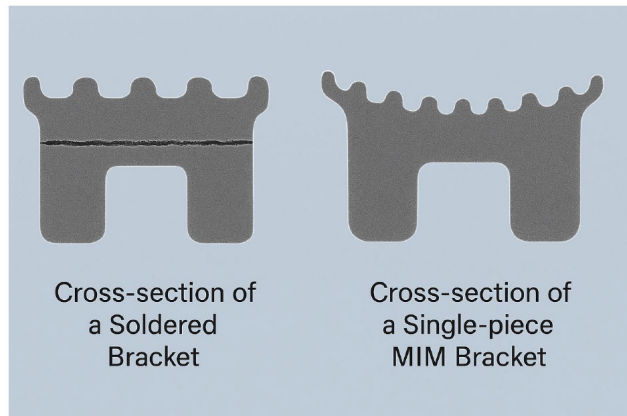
Cross-sectional illustration of a soldered orthodontic bracket (left) and a single-piece MIM-manufactured bracket (right).
